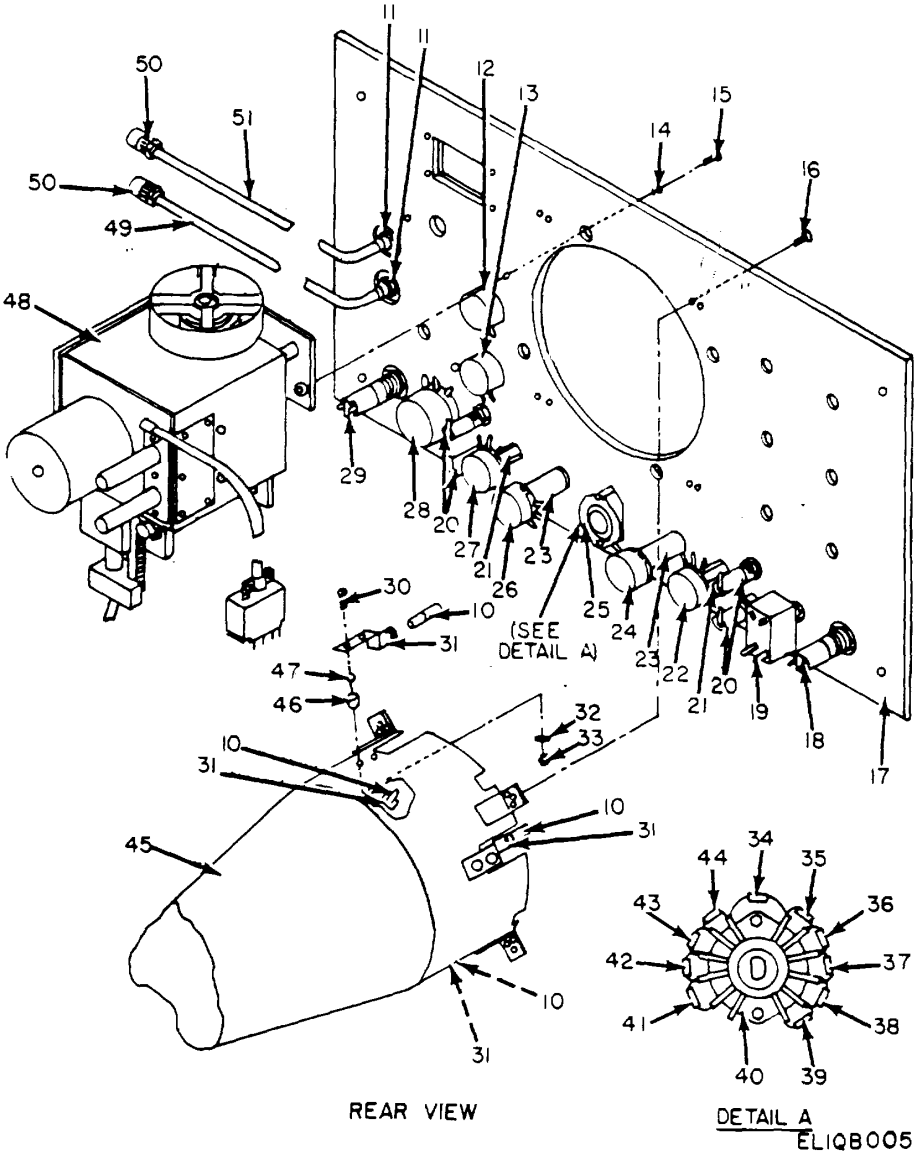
Chassis Assembly, Power Supply (Sheet 2 of 2).
